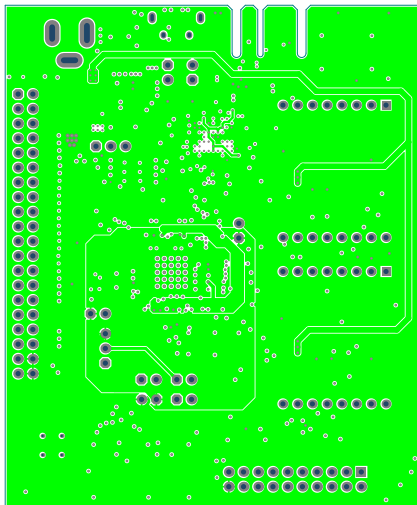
PIC32CXMTG-EK Layout: Bottom Layer
